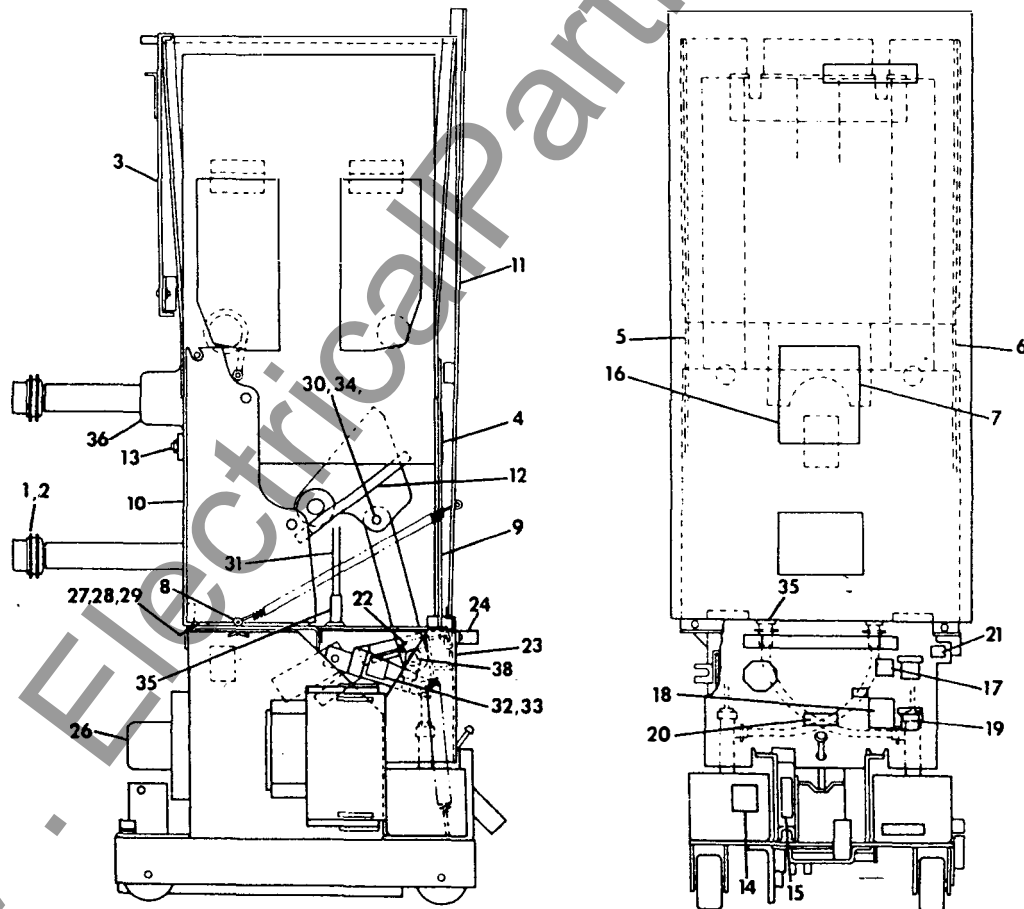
Type MA-350C Solenoid Operated Breaker Assembly
